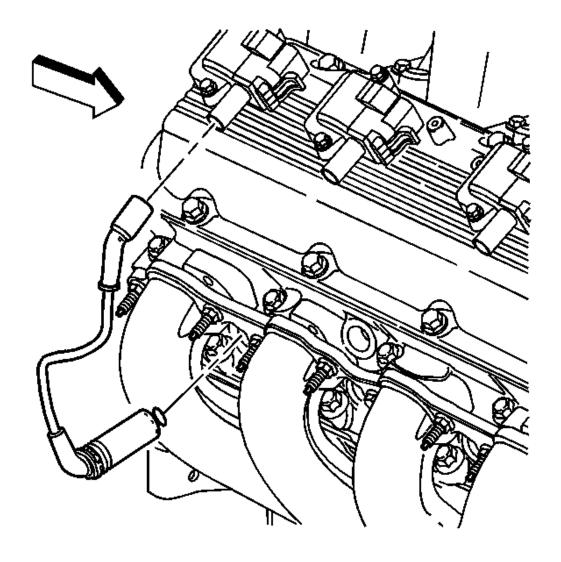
View Of Spark Plug Wires (Right) Courtesy of GENERAL MOTORS CORP.
